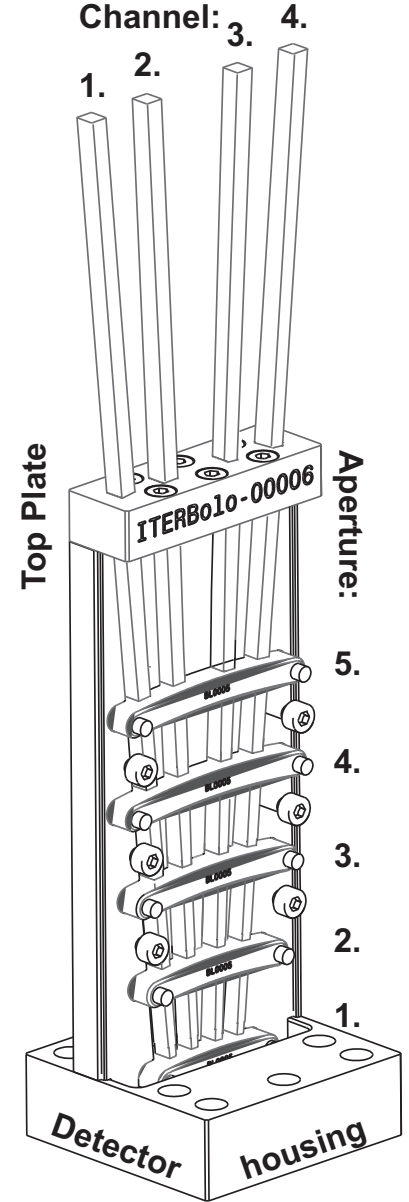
Isometric CAD view of the collimator prototype Model '12.
